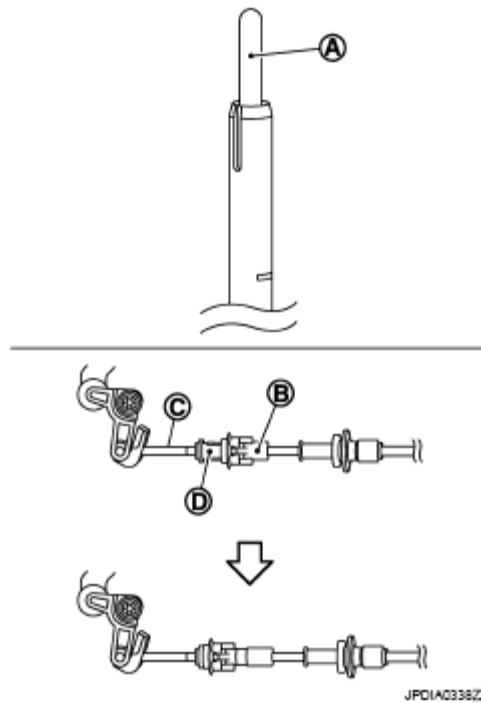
Identifying Adjust Holder, Casing Cap And Key Interlock Rod
